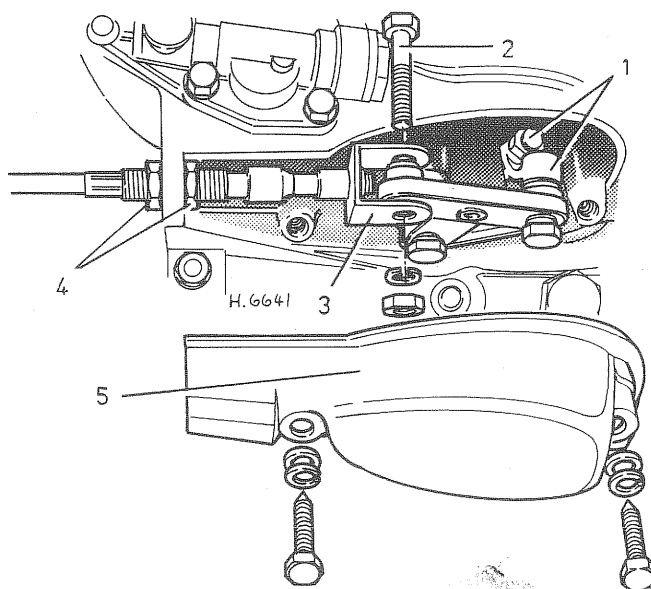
Gear selector cable adjustment (Sec 22)
